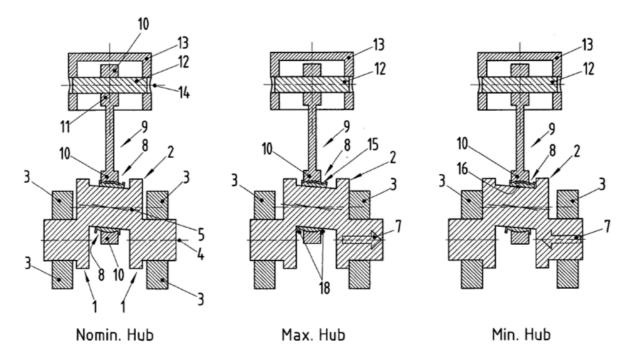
illustrates a crank gearing comprising primarily only links and levers for converting rotary motion of the crank shaft (1) into reciprocating motion of the piston (13) which functions as a guided slide. Crankshaft (1) comprises an oblique crank pin (9). The throw, i.e. the length of the reciprocating motion of piston (13), is adjusted by moving crankshaft (1) in a different axial position. The axial movement of crankshaft (1) between a minimum and maximum throw is shown by arrow (7).
